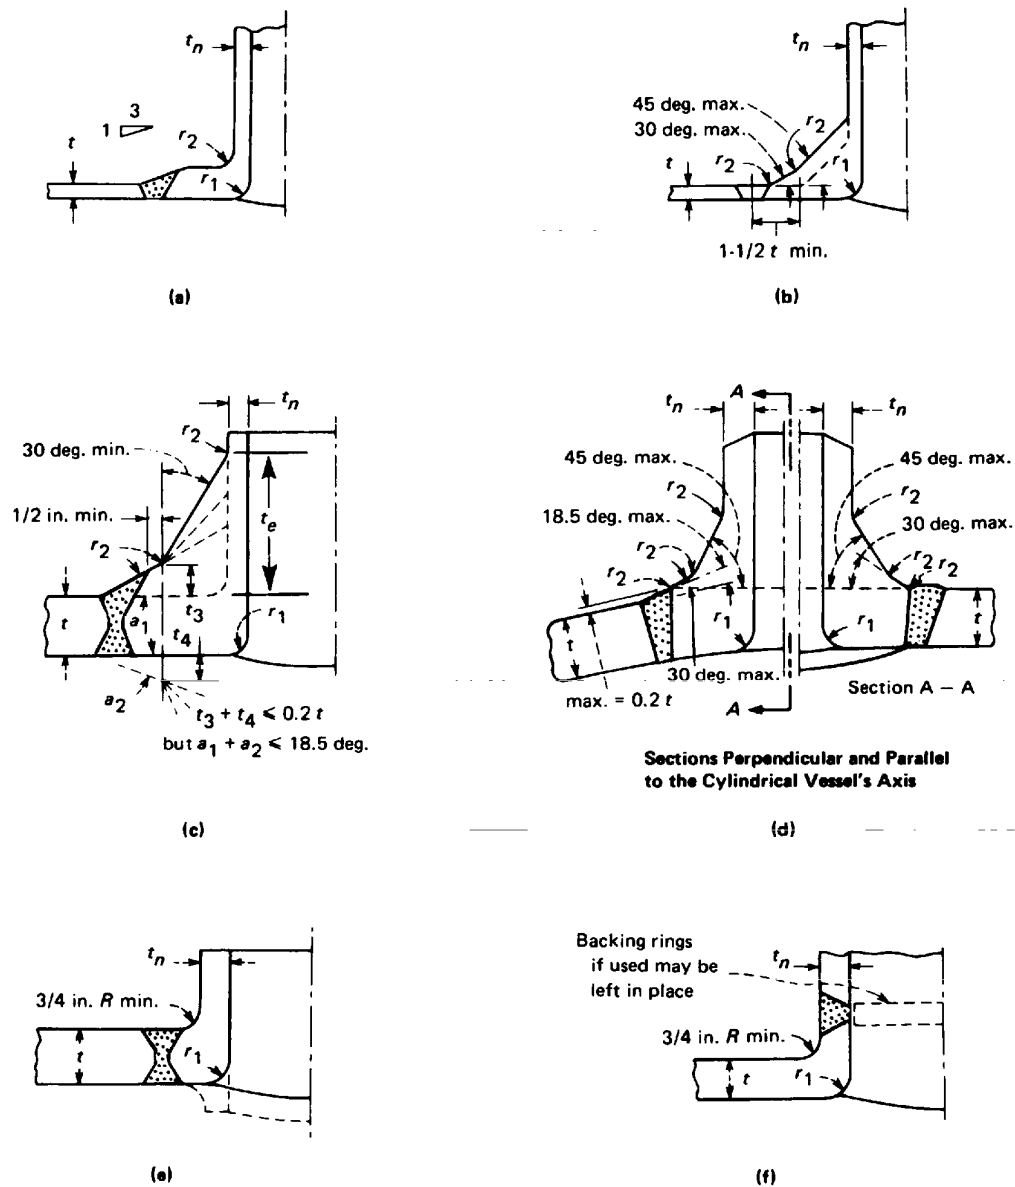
(a)-1 NOZZLES, BRANCH, AND PIPING CONNECTIONS JOINED BY FULL PENETRATION BUTT WELDS
